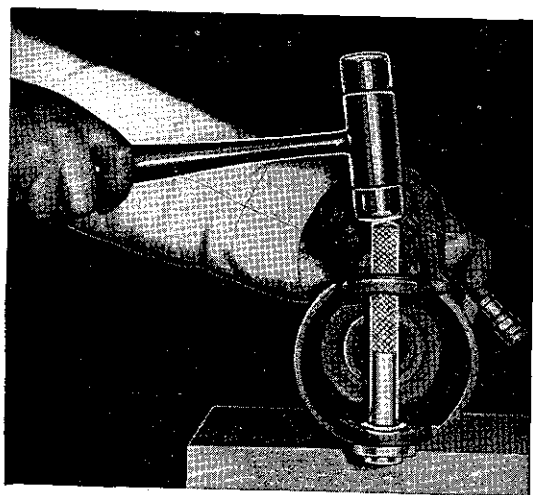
SPINDLE PIN BEARING CUP DRIVER
